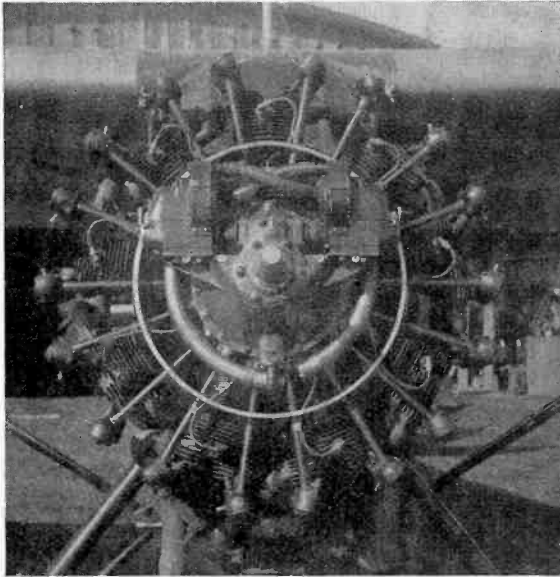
Early shielding installation on Wright J-5 airplane engine. A special shielded ignition distributing harness is here employed.
